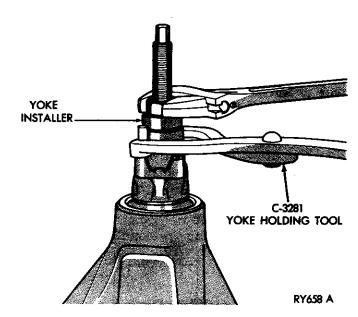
Drive Pinion Gear Shaft (Axle) Yoke Installation
